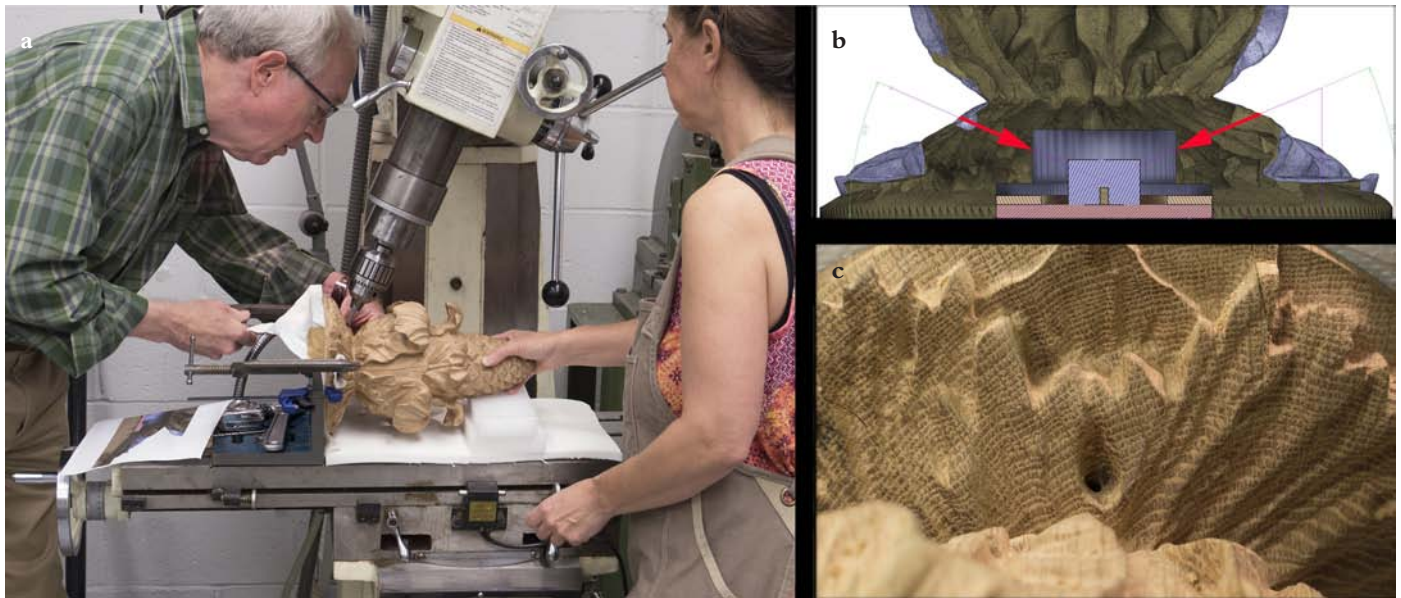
Drilling holes into the finial base for attachment to mount. a, b. Joseph Hutchins and Jody Hanson drilling the two holes into the reproduction finials. The head of the milling machine was set to the correct angle as outlined in (b). c. The two holes for the screws were drilled in concealed places. (© The Metropolitan Museum of Art)
